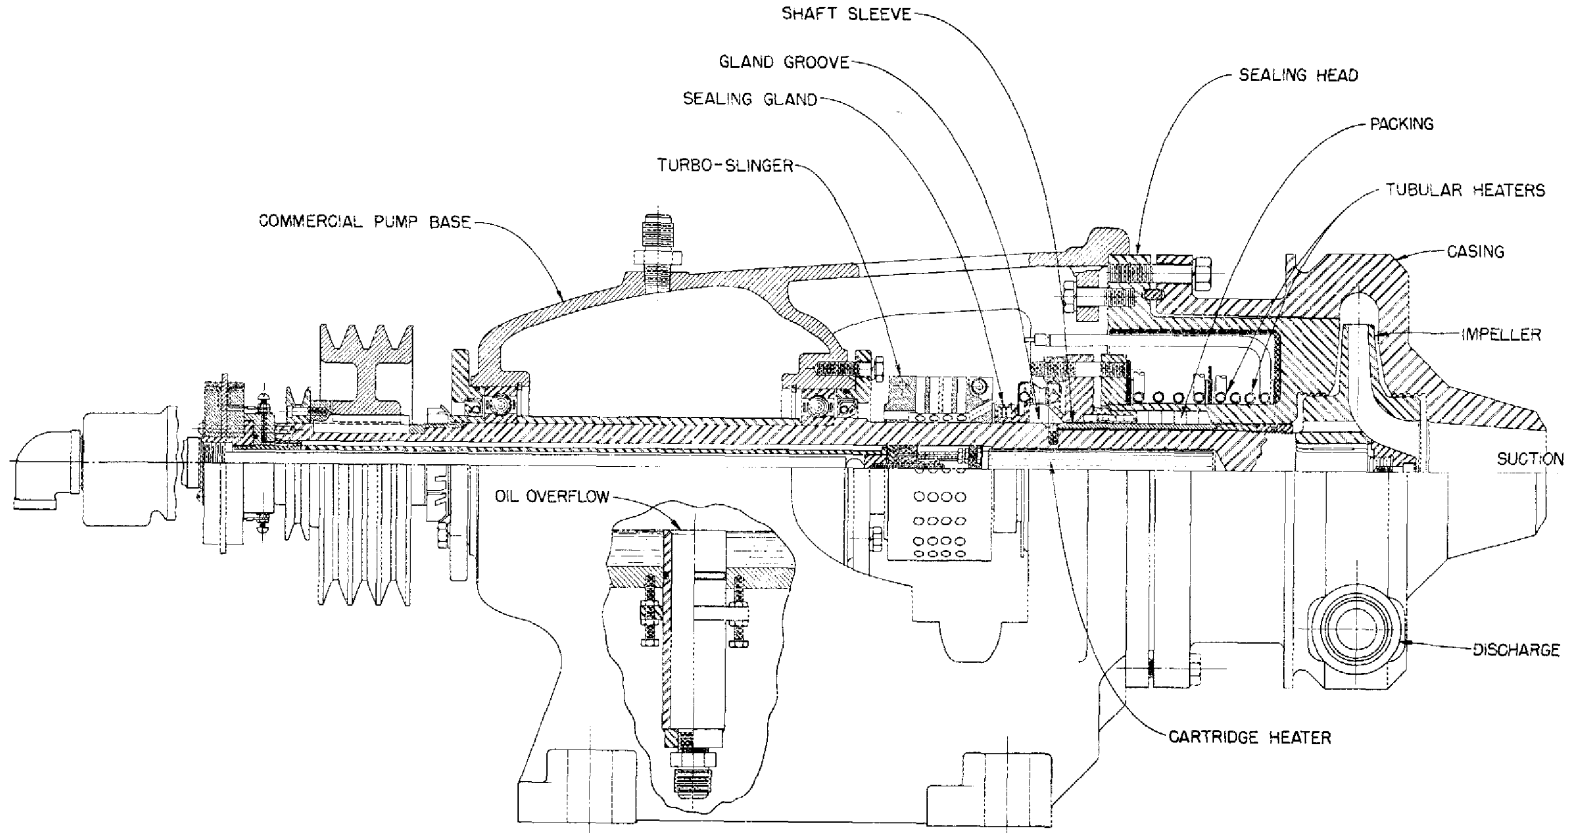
Assembly of ARE Pump. Sectional view.
